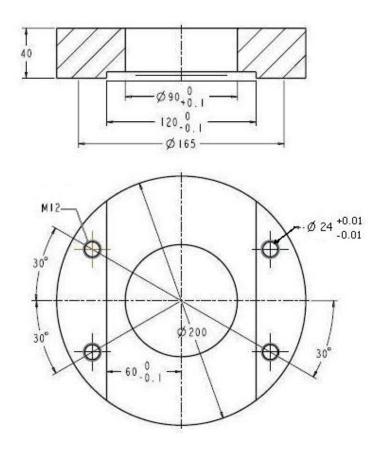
Technical Drawing of the Guide Plate of Blanking Die Set
